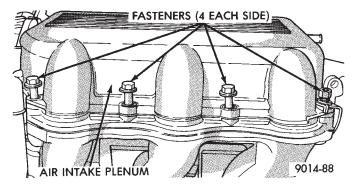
Air Intake Plenum to Intake Manifold Attaching Fasteners
